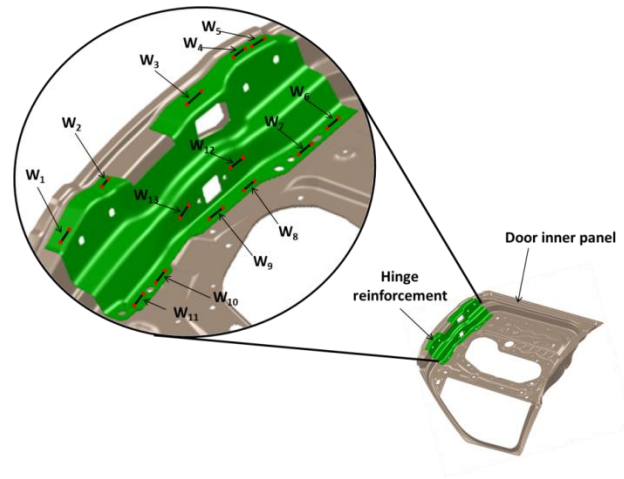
Door Inner Panel and hinge assembly having 13 stitches (W_1 - W_{13})
